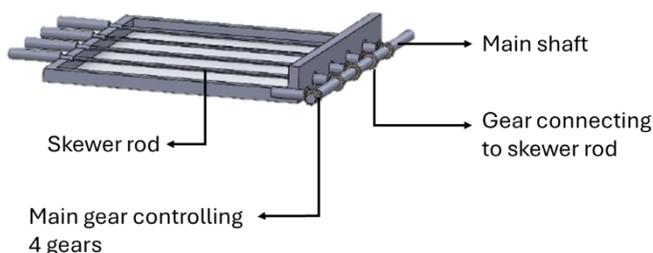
The Solidworks illustration depicts an assembly of four steel rods connected to individual gears, controlled by a main gear, forming a mechanism for the four-skewer setup.
